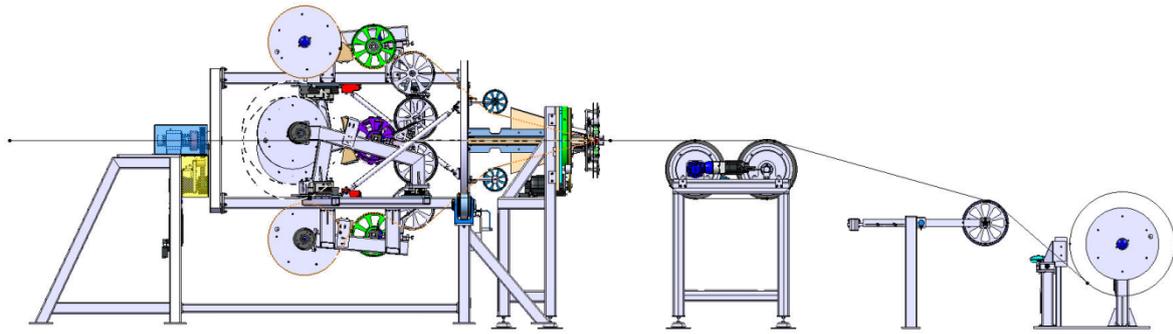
Rotating machine for the twisting of the insulated stacks of the conductor – assembly of twisted-pair cables.
